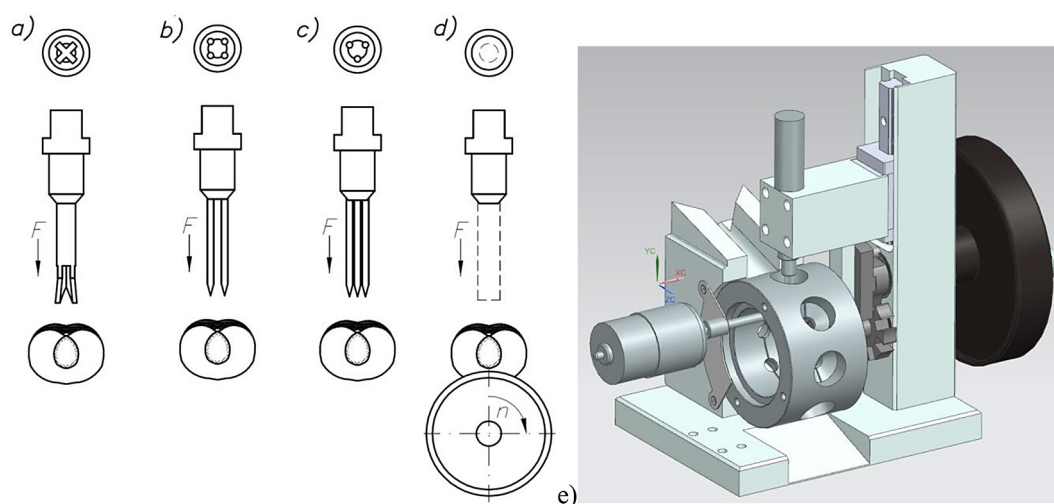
Tools used for pitting cherries: (a) a cross-shaped tool, (b) a four-needle tool, (c) a three-needle tool, (d) a knife for cutting under the fruit to facilitate pits removal, (e) testing station
